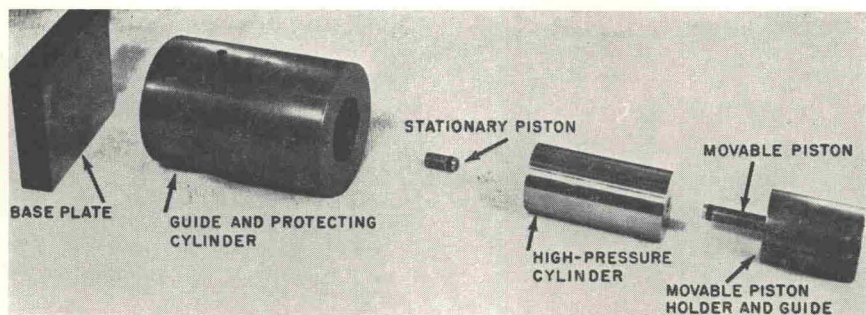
Exploded view of 10 kbar high-pressure chamber.
